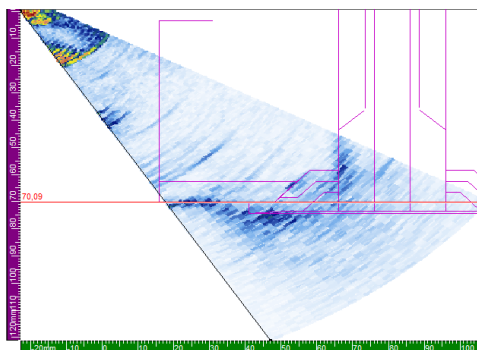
PAUT measurement by search unit 3,5L16-A3 on the defect free part of the PMPN test assembly
